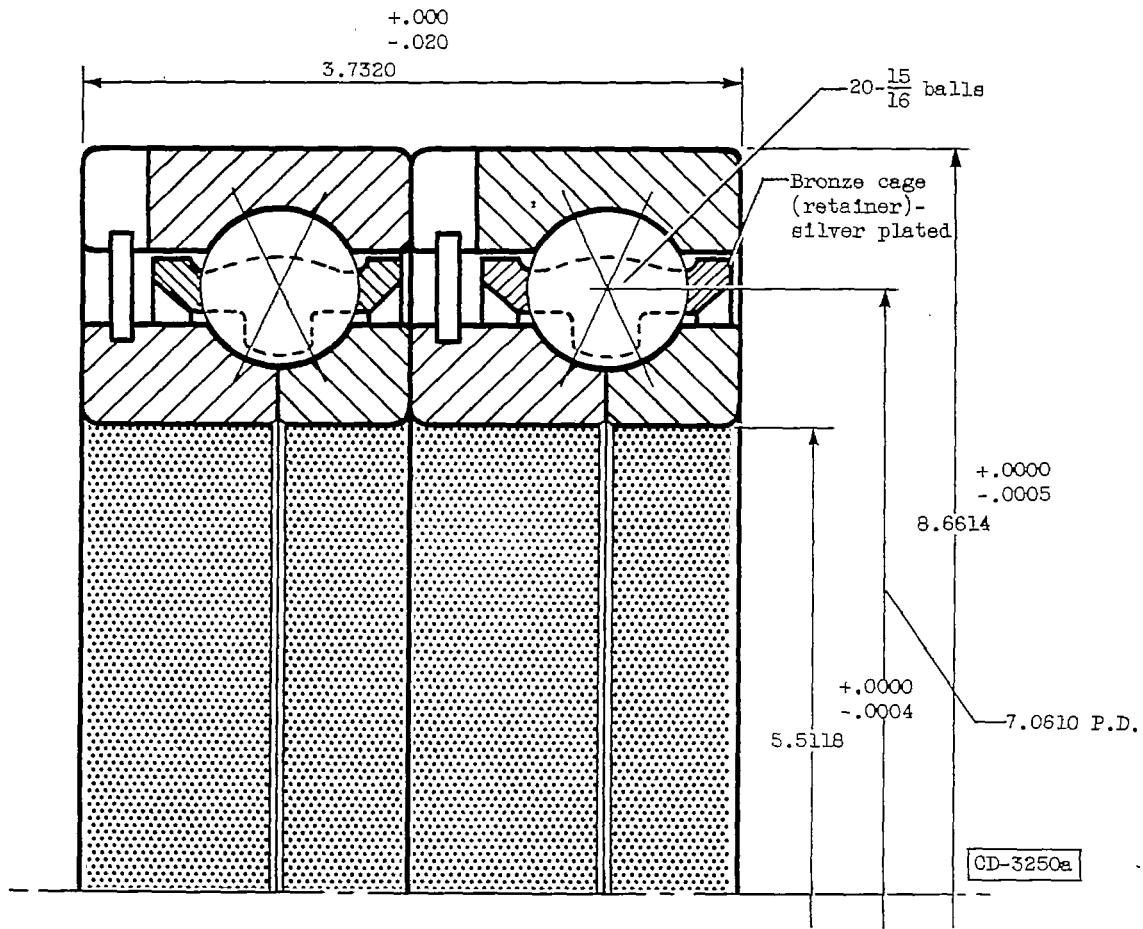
Two angular-contact, double thrust bearings, duplex ground.
